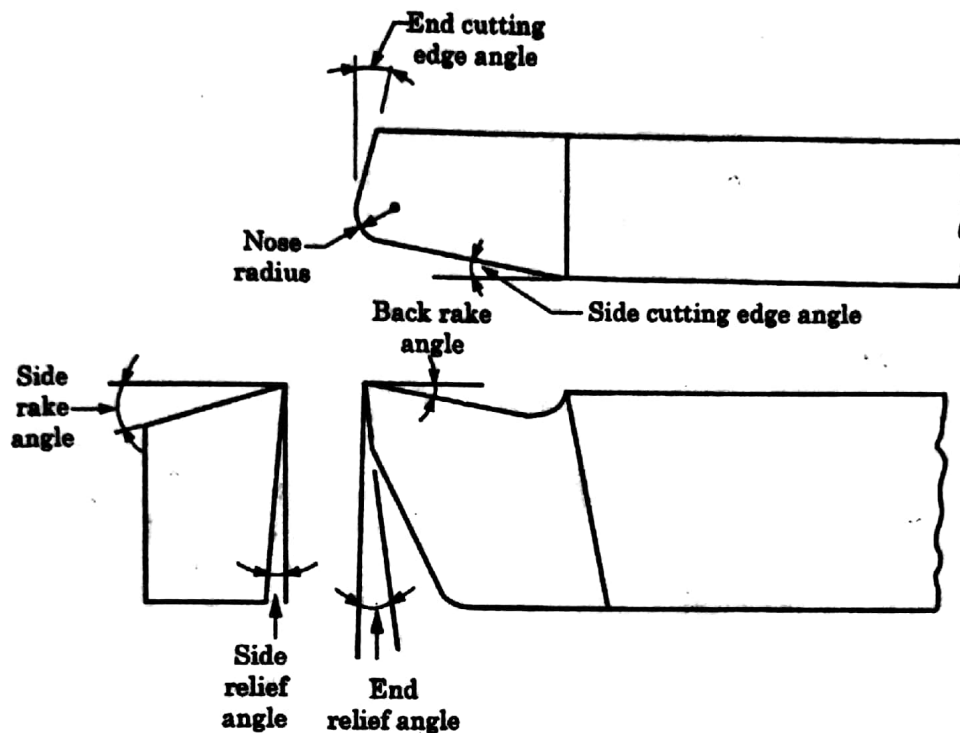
Principal Angles of a Single Point Cutting Tool
